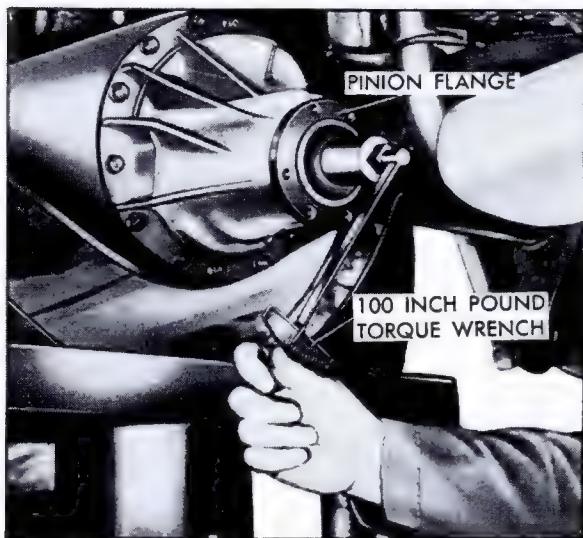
Checking Pinion Shaft Pre-Load Torque
